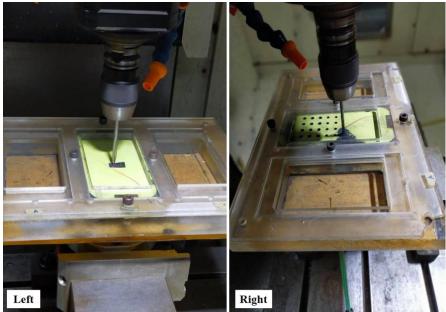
Calibration process of CNC Milling machine (Left) and the drilling process of the CFRP workpiece (Right)
